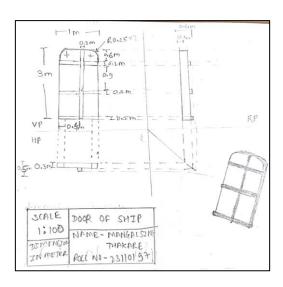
view of Outer Door with dimension draw by Mangalsing Thakar
